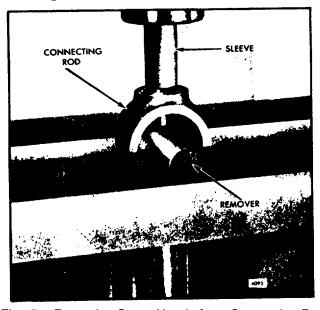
Removing Spray Nozzle from Connecting Rod
